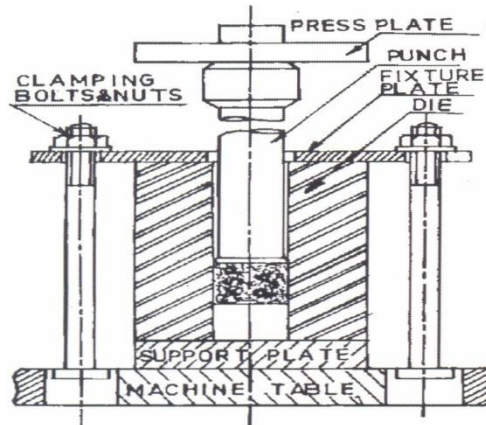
Die, Punch and the Bottom Insert Compaction Assembly along with the Powder Blend.
